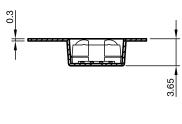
Issue: 2; 06.10.15
